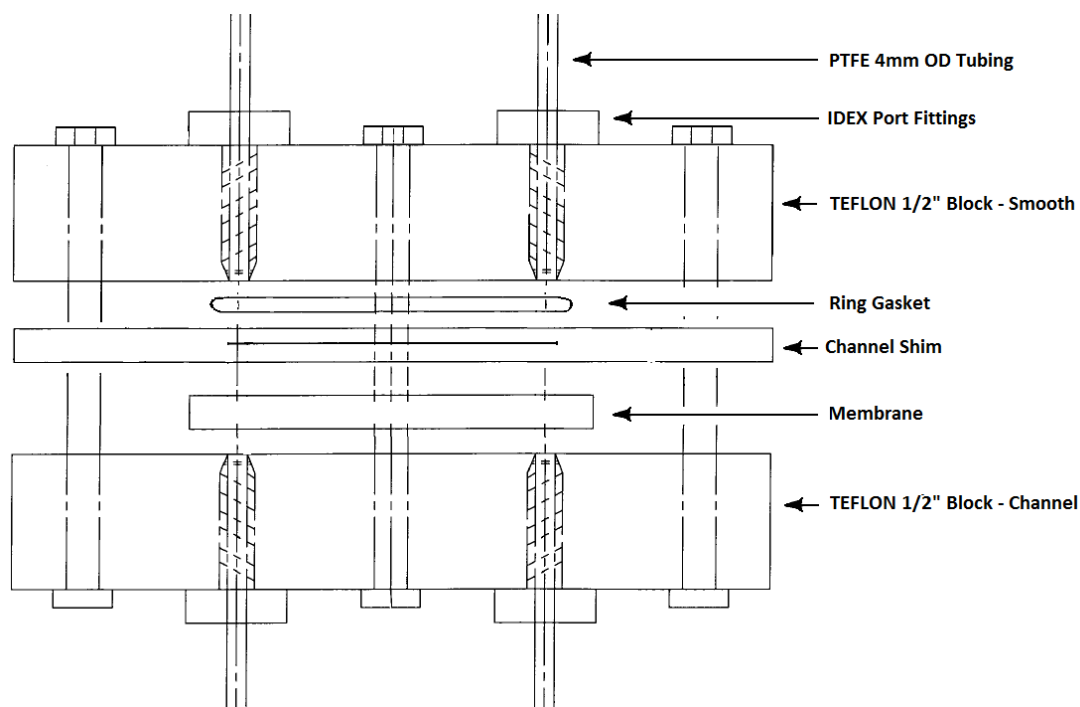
Part assembly, with feed block and channel at top, and strip channel inside shim at center. The smooth bottom block applies compression to the gasket, holding the membrane in place, and seals the channels internally.
